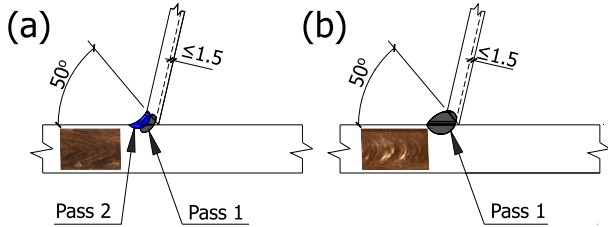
Welding procedure of: (a) S1; (b) S2, and the representative weld surface photos (unit: mm).
